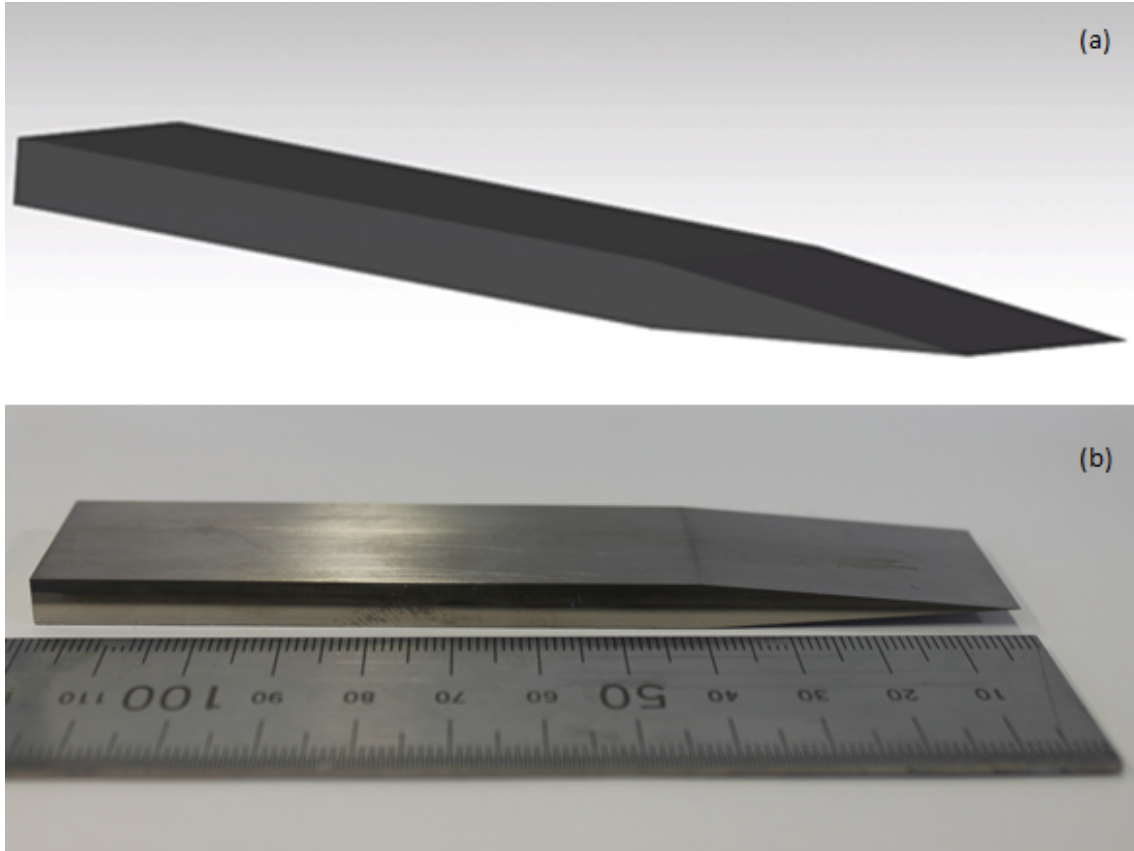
Control double-scarf joint: (a) 3D CAD image, (b) micro-machined joint
